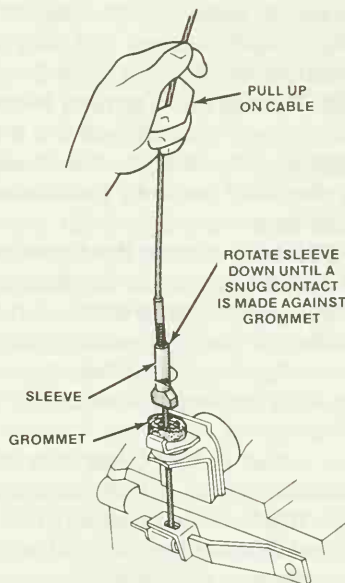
Adjusting the free play on a clutch cable. (Chrysler Corporation)
